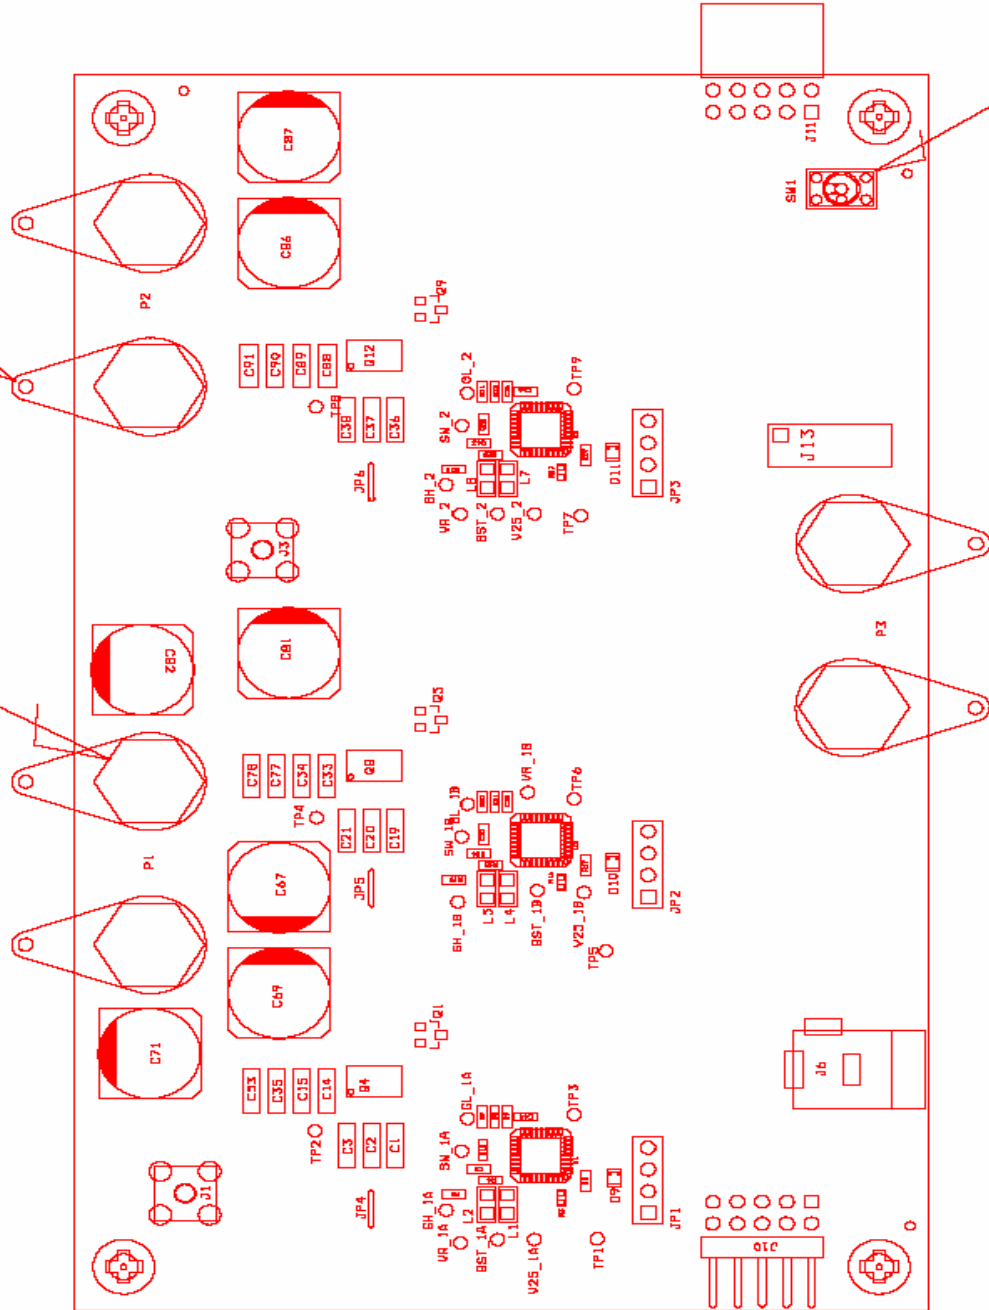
PCB – BOTTOM LAYER (VIEWED FROM TOP)
